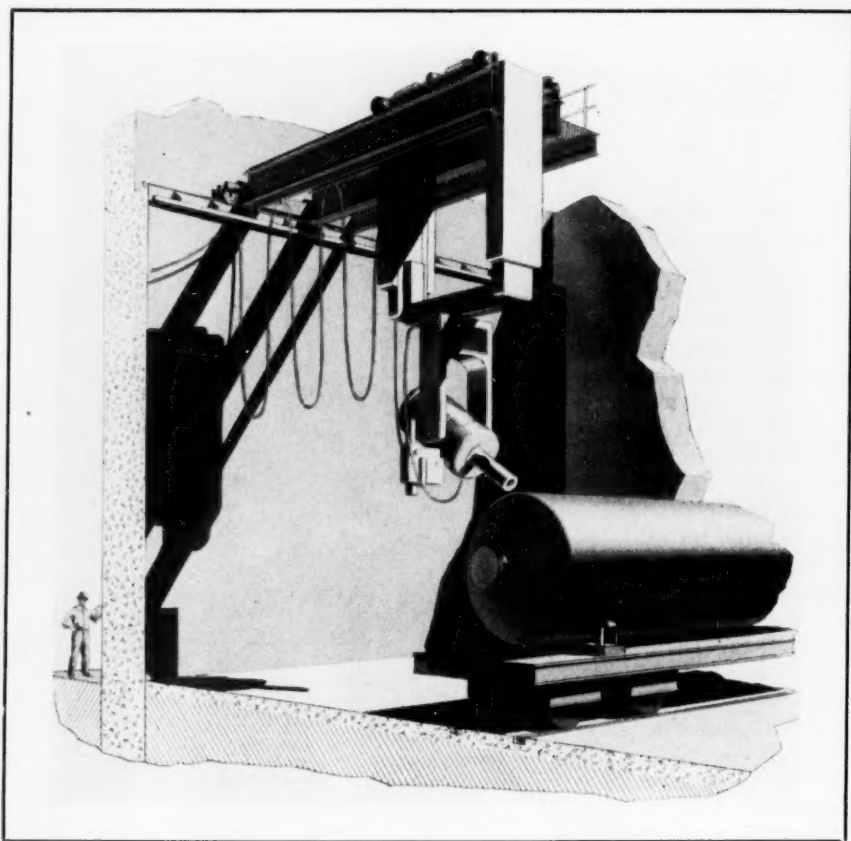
This artist's detail drawing illustrates how the 2-million-volt crane-supported X-ray appears in operation within its own special building.
